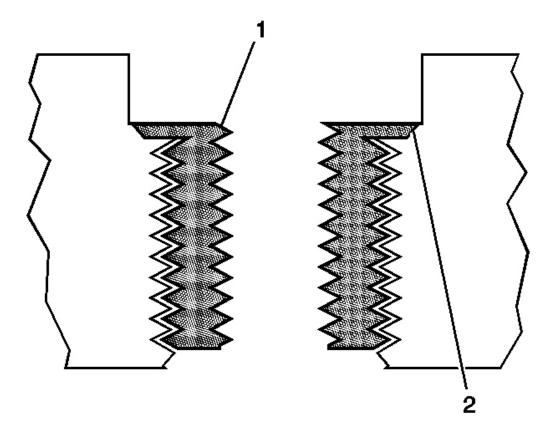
Inspecting Insert For Proper Installation - Recessed Thread Courtesy of GENERAL MOTORS CORP.
